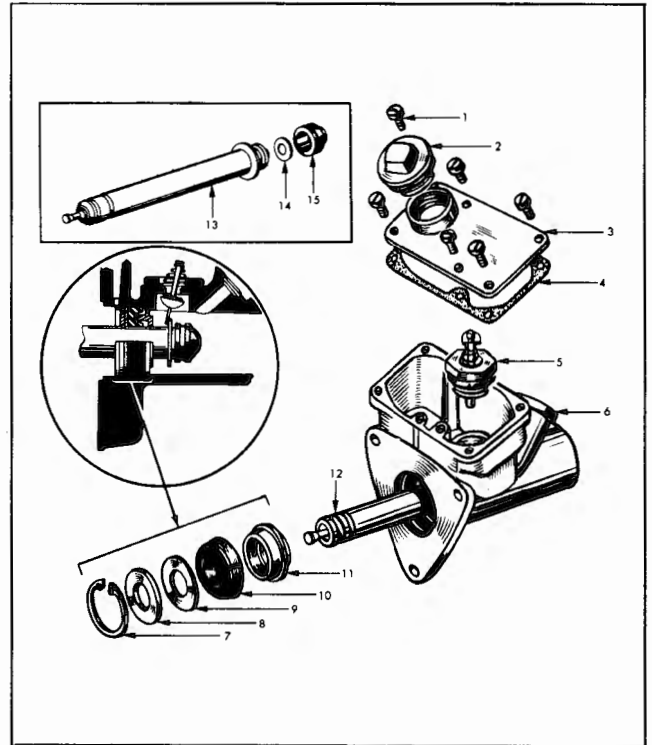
Assembly of Plunger Seal, Plate and Valve Cover
